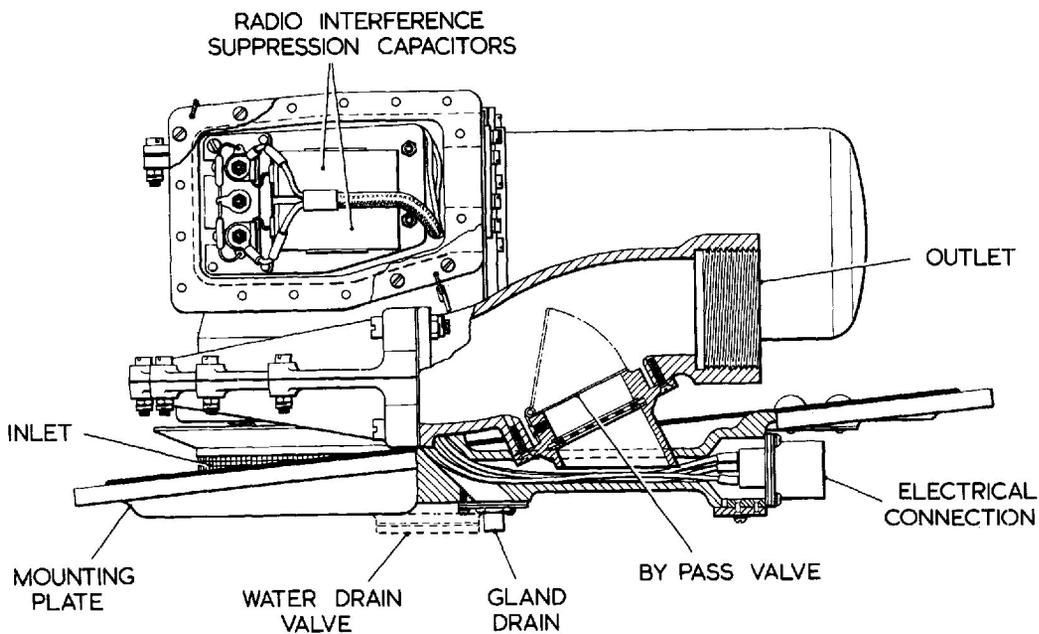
Sectional view of SPE.1207 Mk.2 outlet and by-pass assembly
